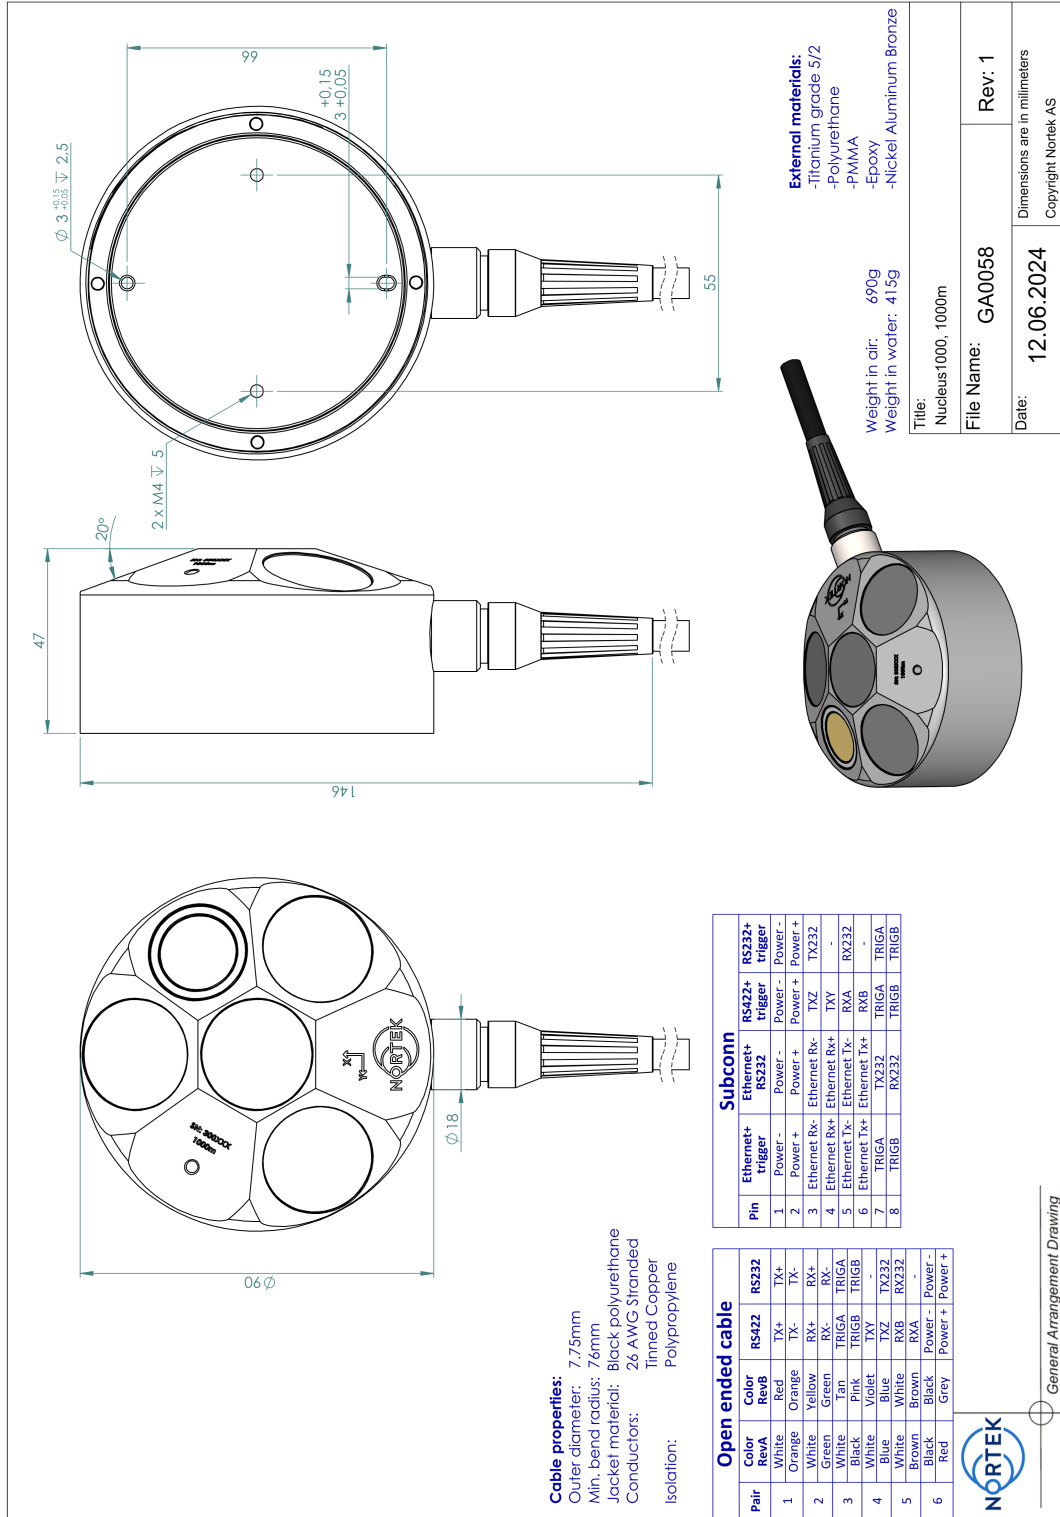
Mechanical Drawing of Nucleus1000 1000m
